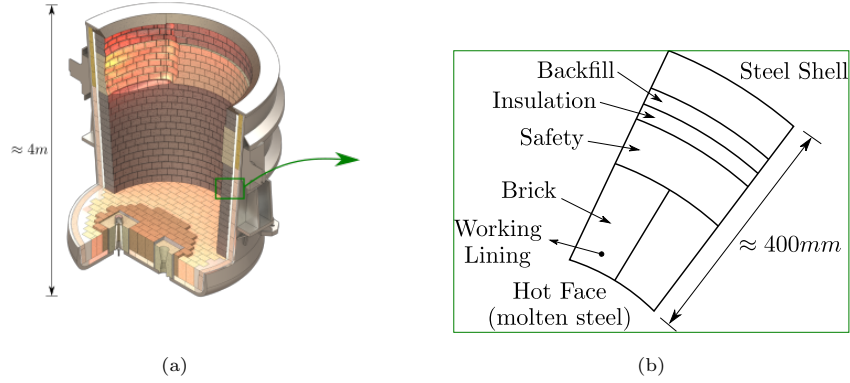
Example of a steel ladle. (a) Cutaway view showing the refractory linings. (b) Schematic representation of a line ring, top view.
